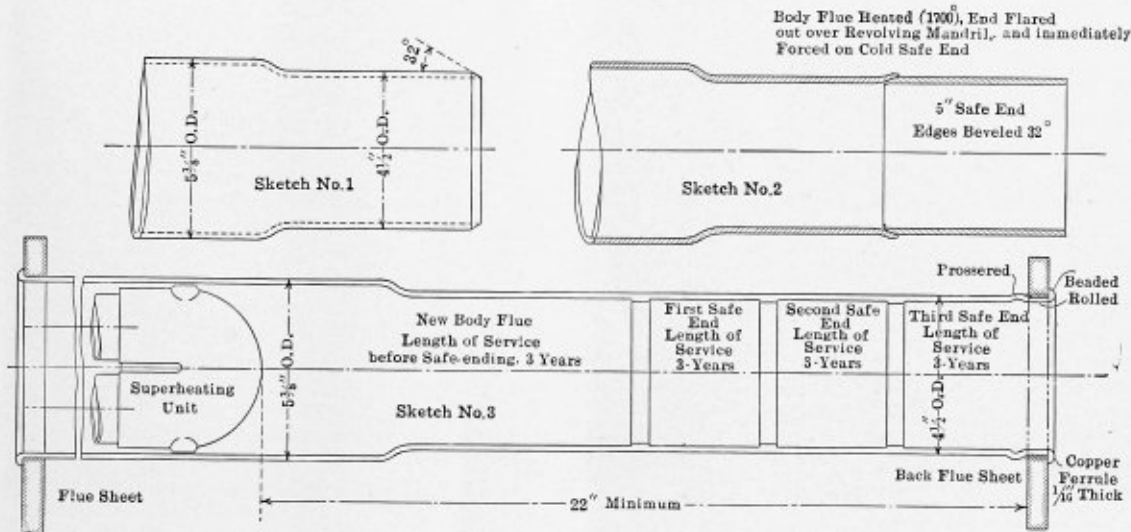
STANDARD PRACTICE FOR WELDING SAFE ENDS ON SUPERHEATING FLUES
